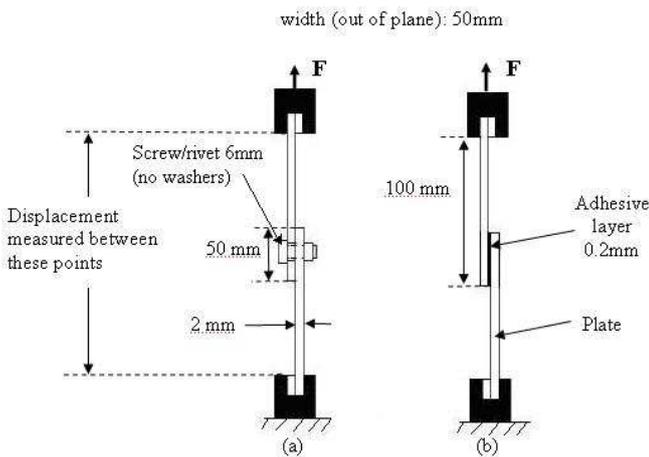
Shear configuration, (a): screwed or riveted joint, (b): bonded joint
